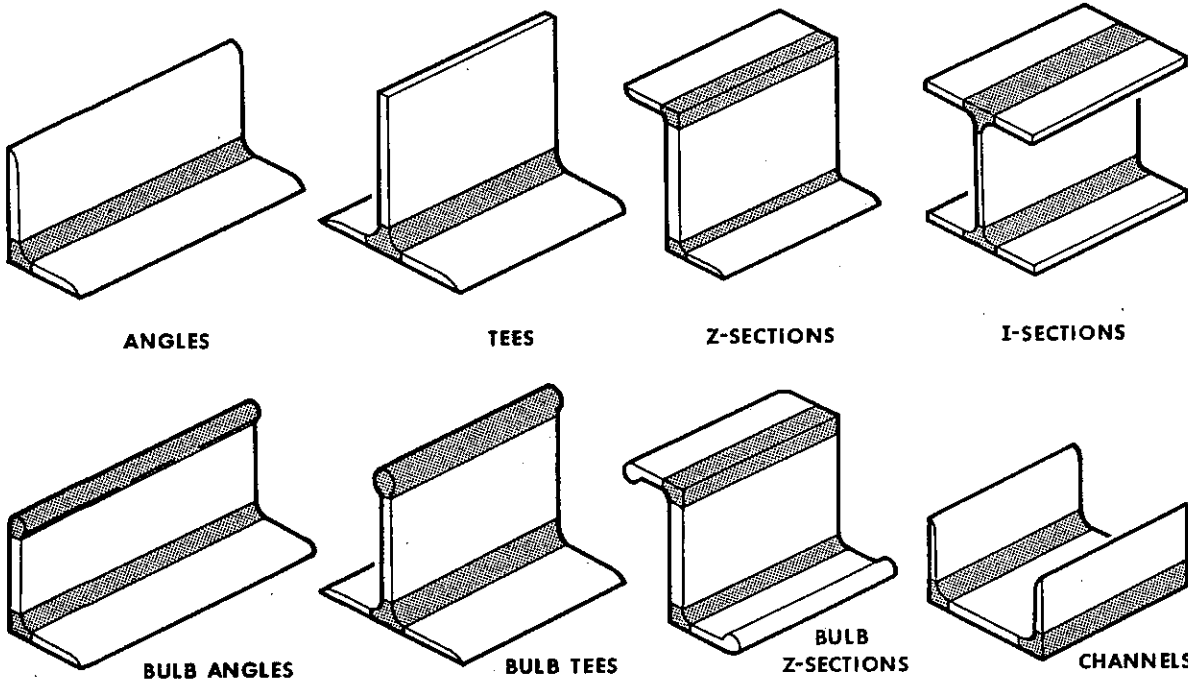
Sheet Metal Sections - Negligible Damage
